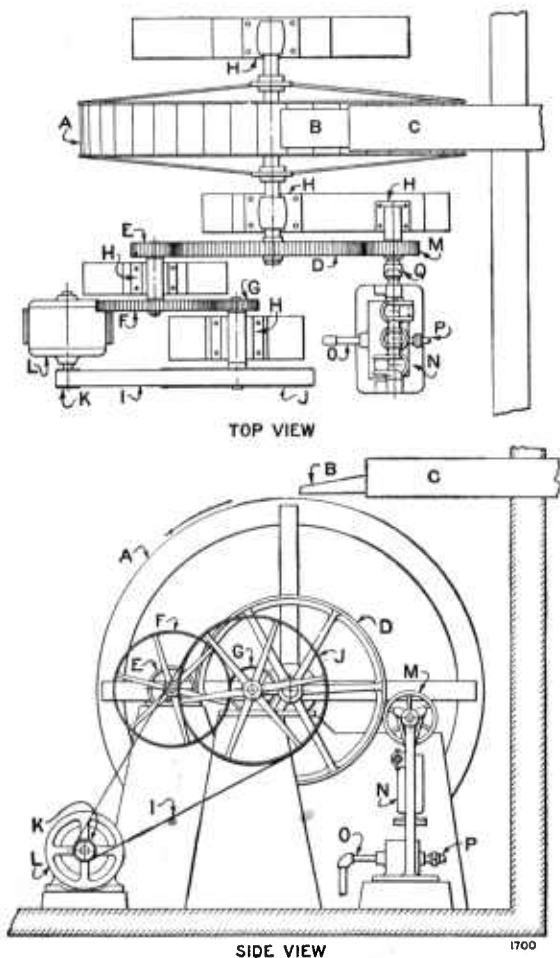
Overshot water-wheel installation showing combined water pump and generator drive. A, water wheel; B, chute; C, flume; D, main drive gear; E, main pinion gear; F, generator drive gear; G, generator pinion gear; H, bearing; I, belt; J, generator drive pulley; K, generator pulley; L, generator; M, pump drive pinion; N, triplex water pump; O, pump suction; P, pump discharge; Q, coupling for disconnecting pump
